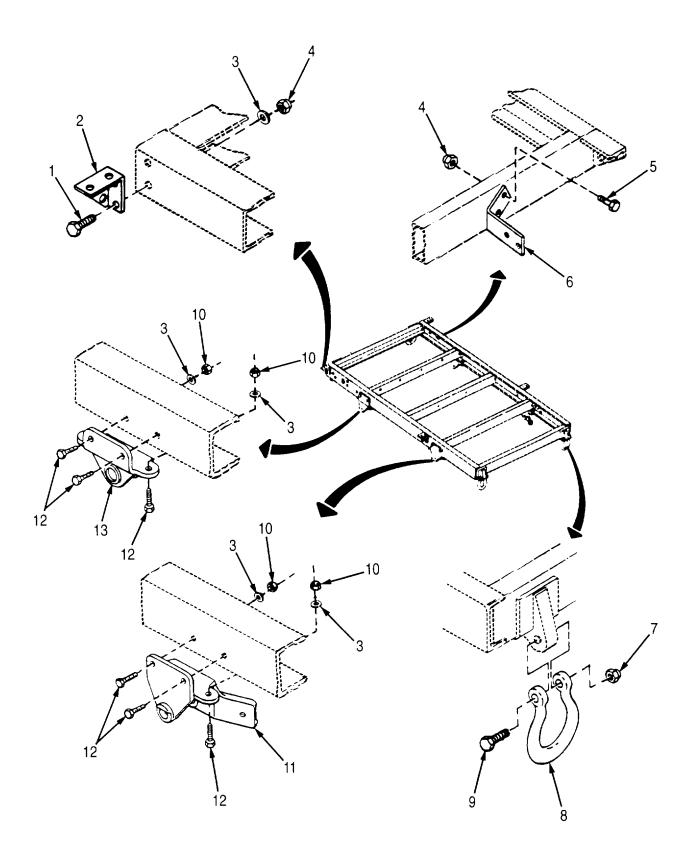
Chassis Frame Assembly (Sheet 1 of 2)
